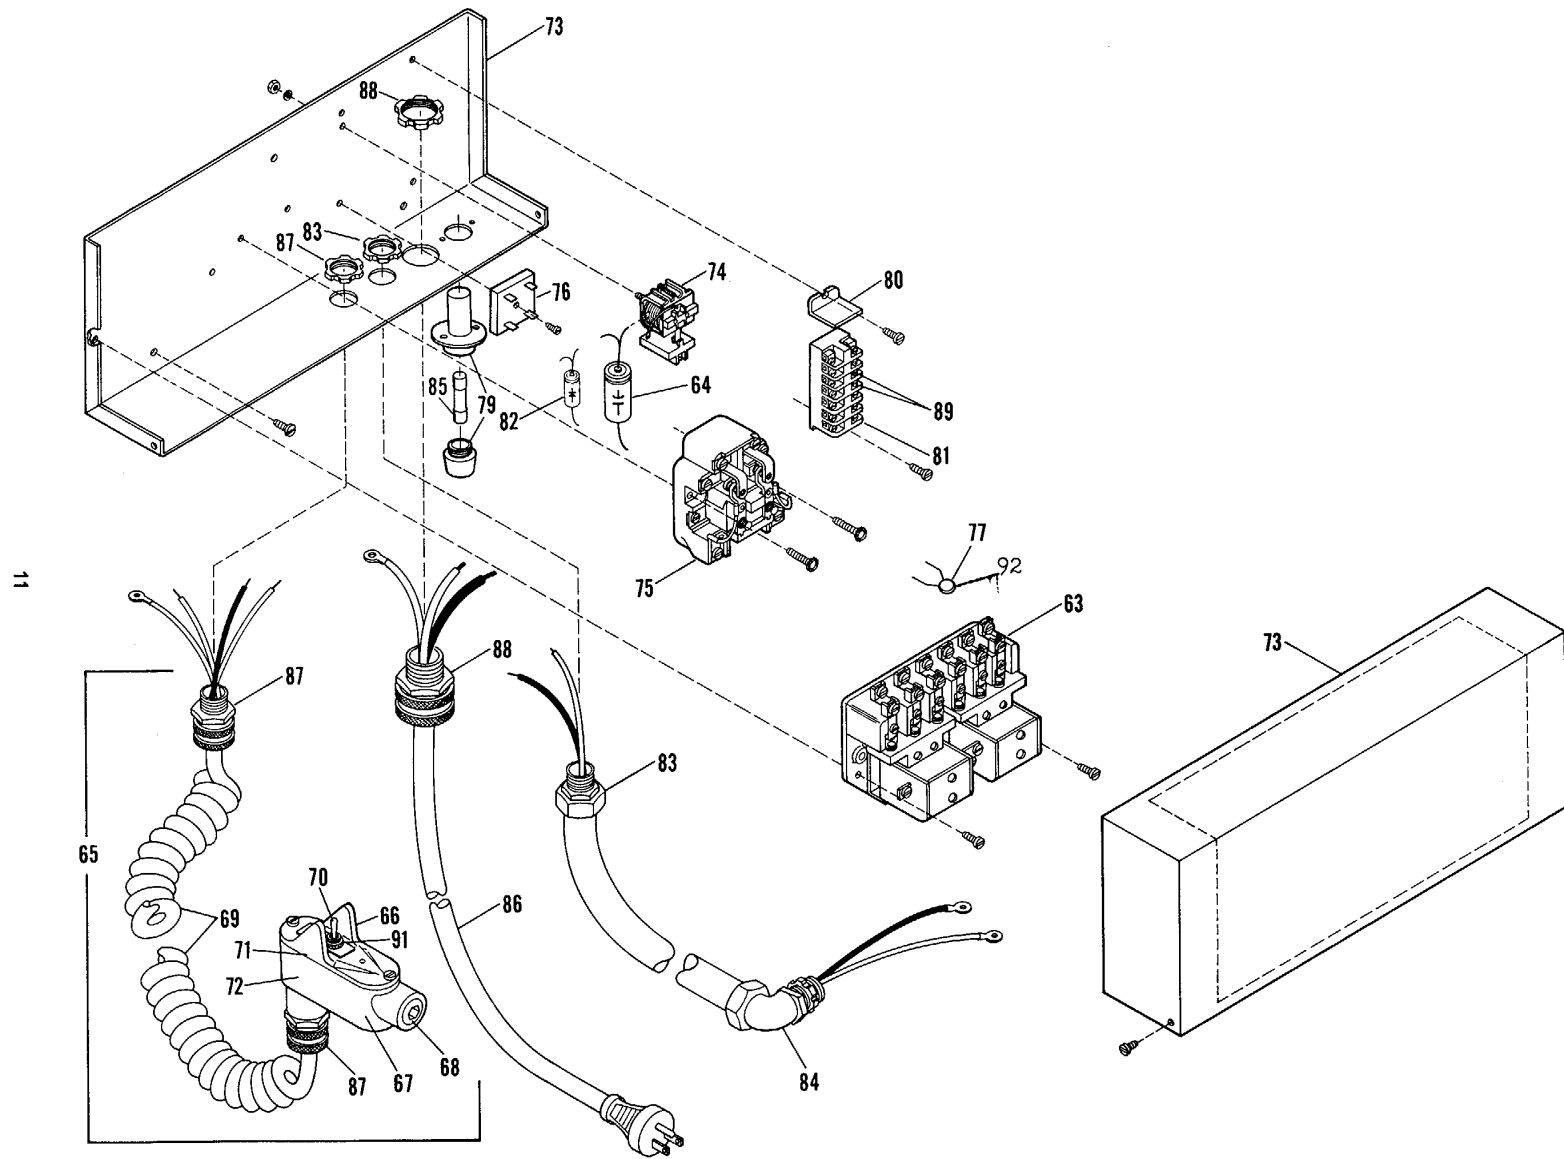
Exploded View Control Box Assembly Eff. S/N PL24101
